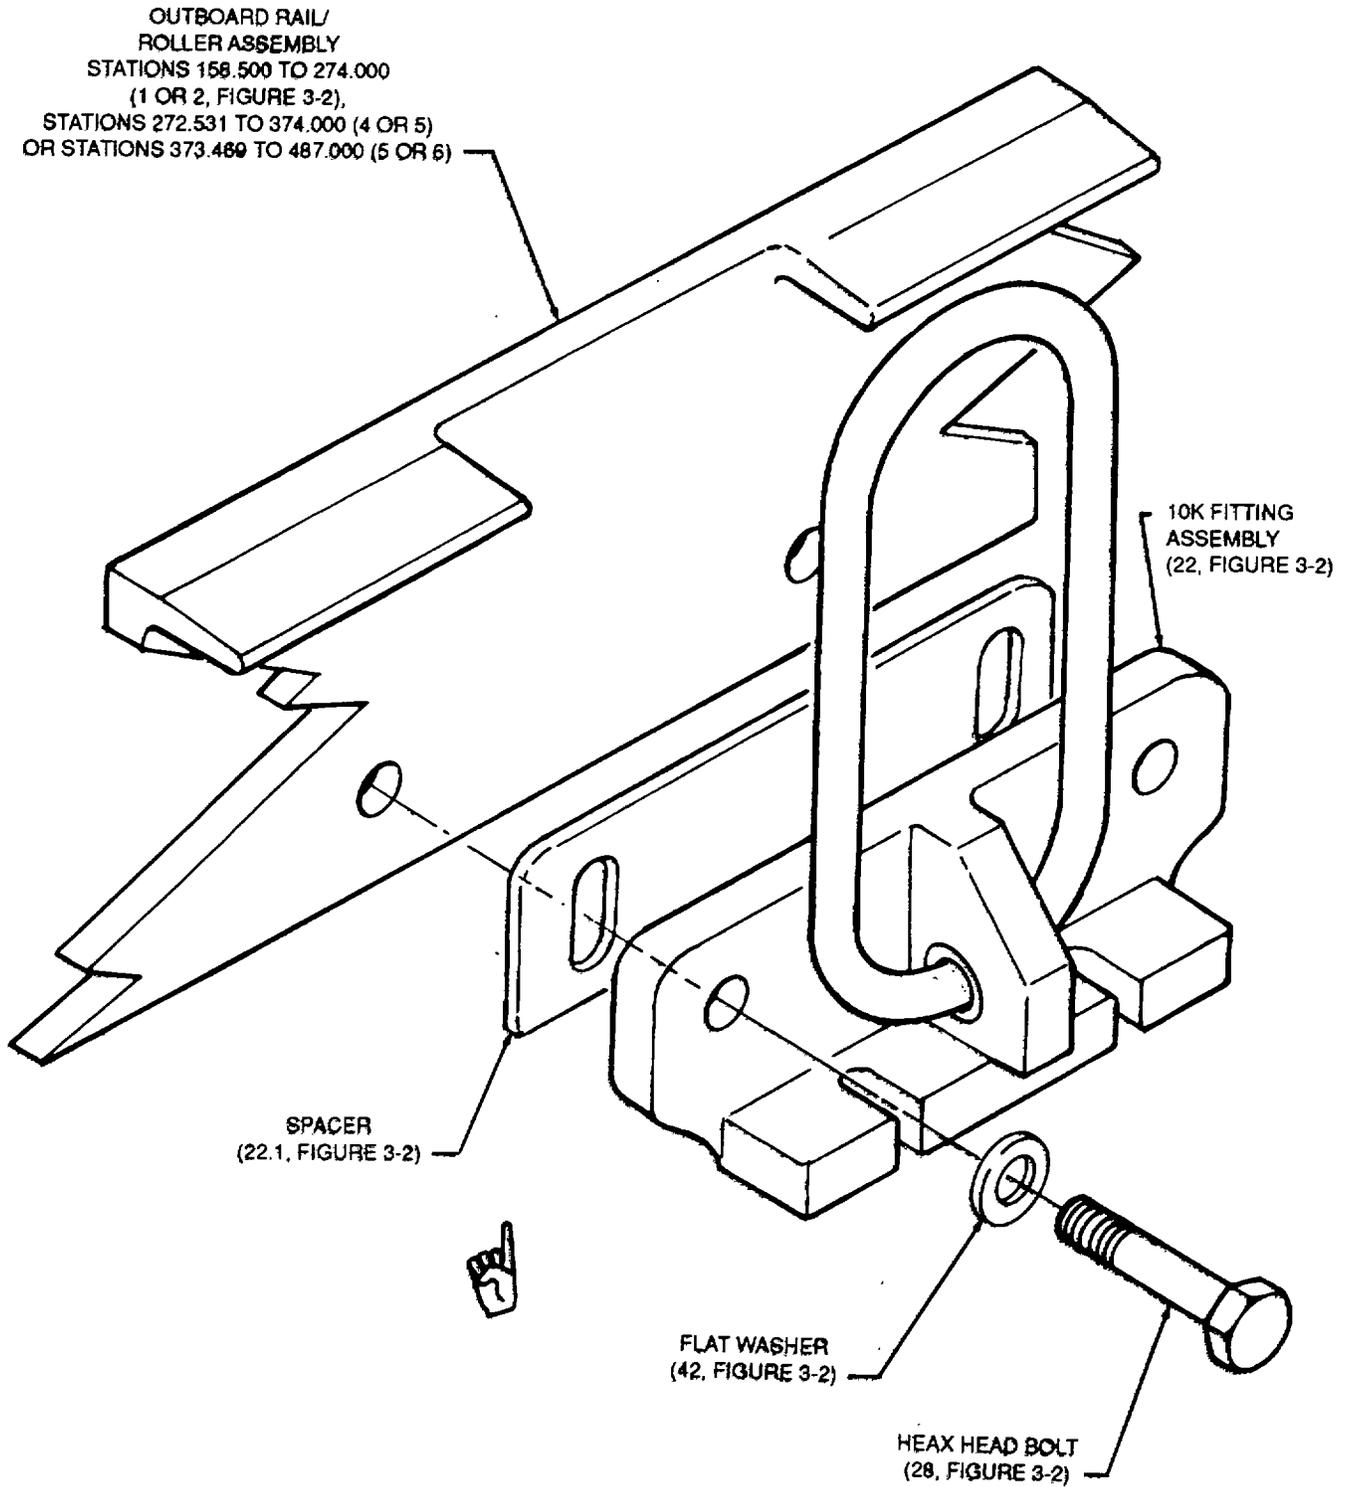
Installing Outboard Rail/Roller Assembly to 10k Fitting Assembly
